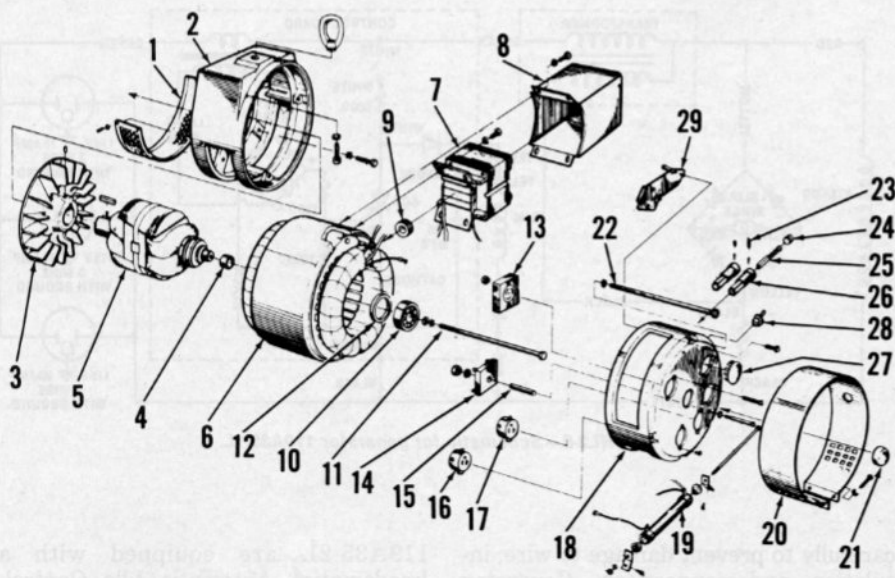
Exploded view of typical generator covered in this section. Switch (28) and control board assembly (29) are used on Loadamatic® Automatic Idle Control† models only.
